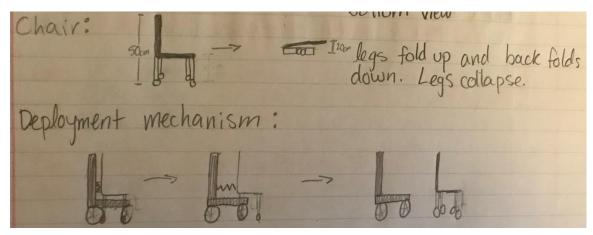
Foldable chair in compact position and deployment mechanism drawing
